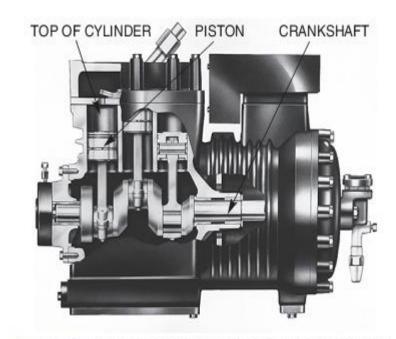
The working parts of a serviceable hermetic compressor. The crankshaft is in the horizontal position, and the rods and pistons move in and out from the center of the shaft. The oil pump is on the end of the shaft and draws the oil from the crankcase at the bottom of the compressor. Courtesy Copeland Corporation
